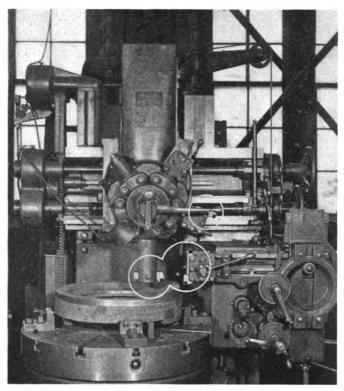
In the finishing of piston bull rings the work is completed with the tools shown
